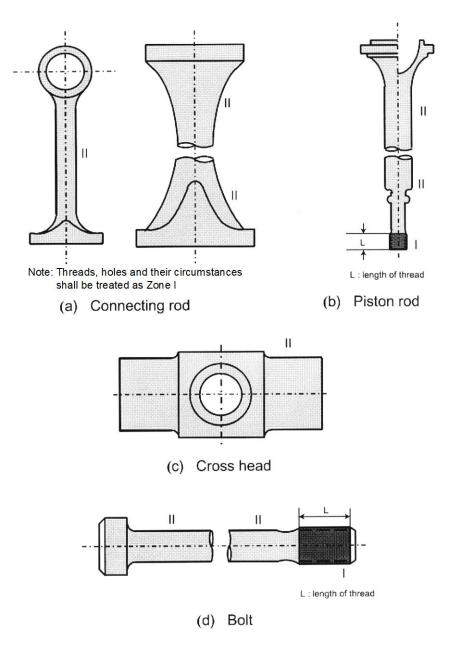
Zones for magnetic particle / liquid penetrant testing on machinery components
